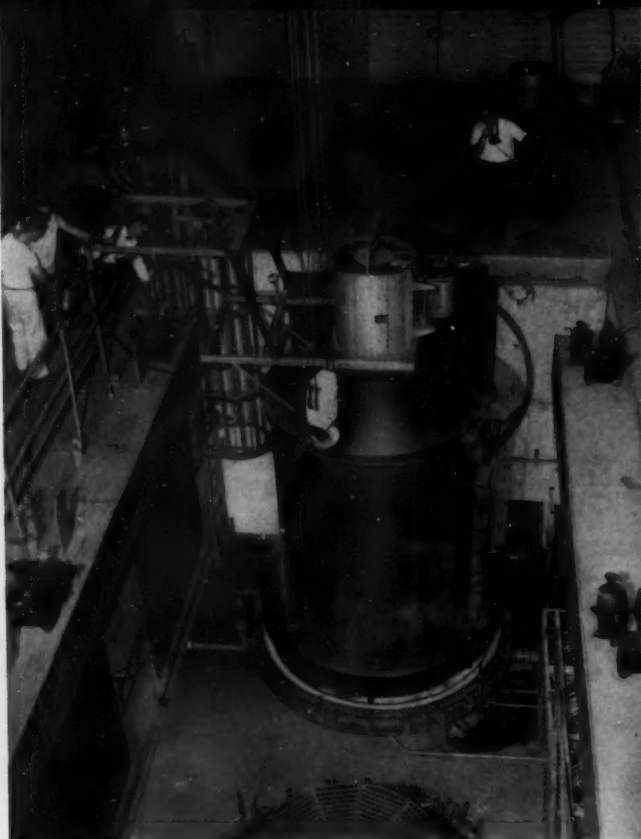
(Right) Cooling hood equipped with a fan and water-spray rings in operation on a hot thrust chamber. The hood is quickly lowered over the retort after the heating bell is removed.
